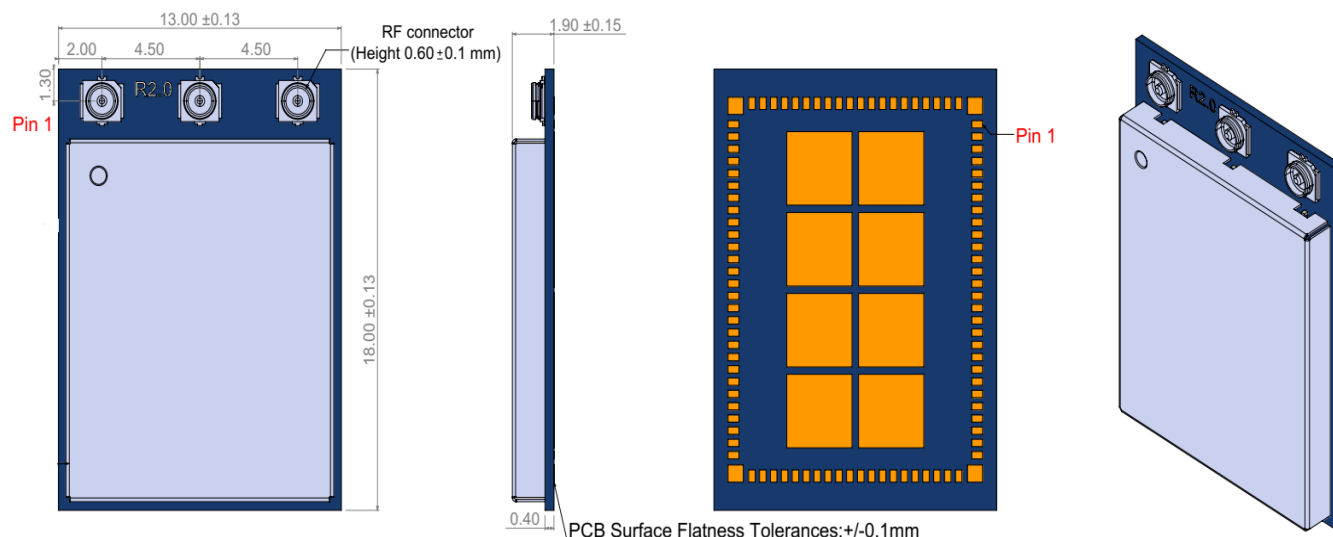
Mechanical Drawing - SMT module with External Antenna Connector (-SC)
